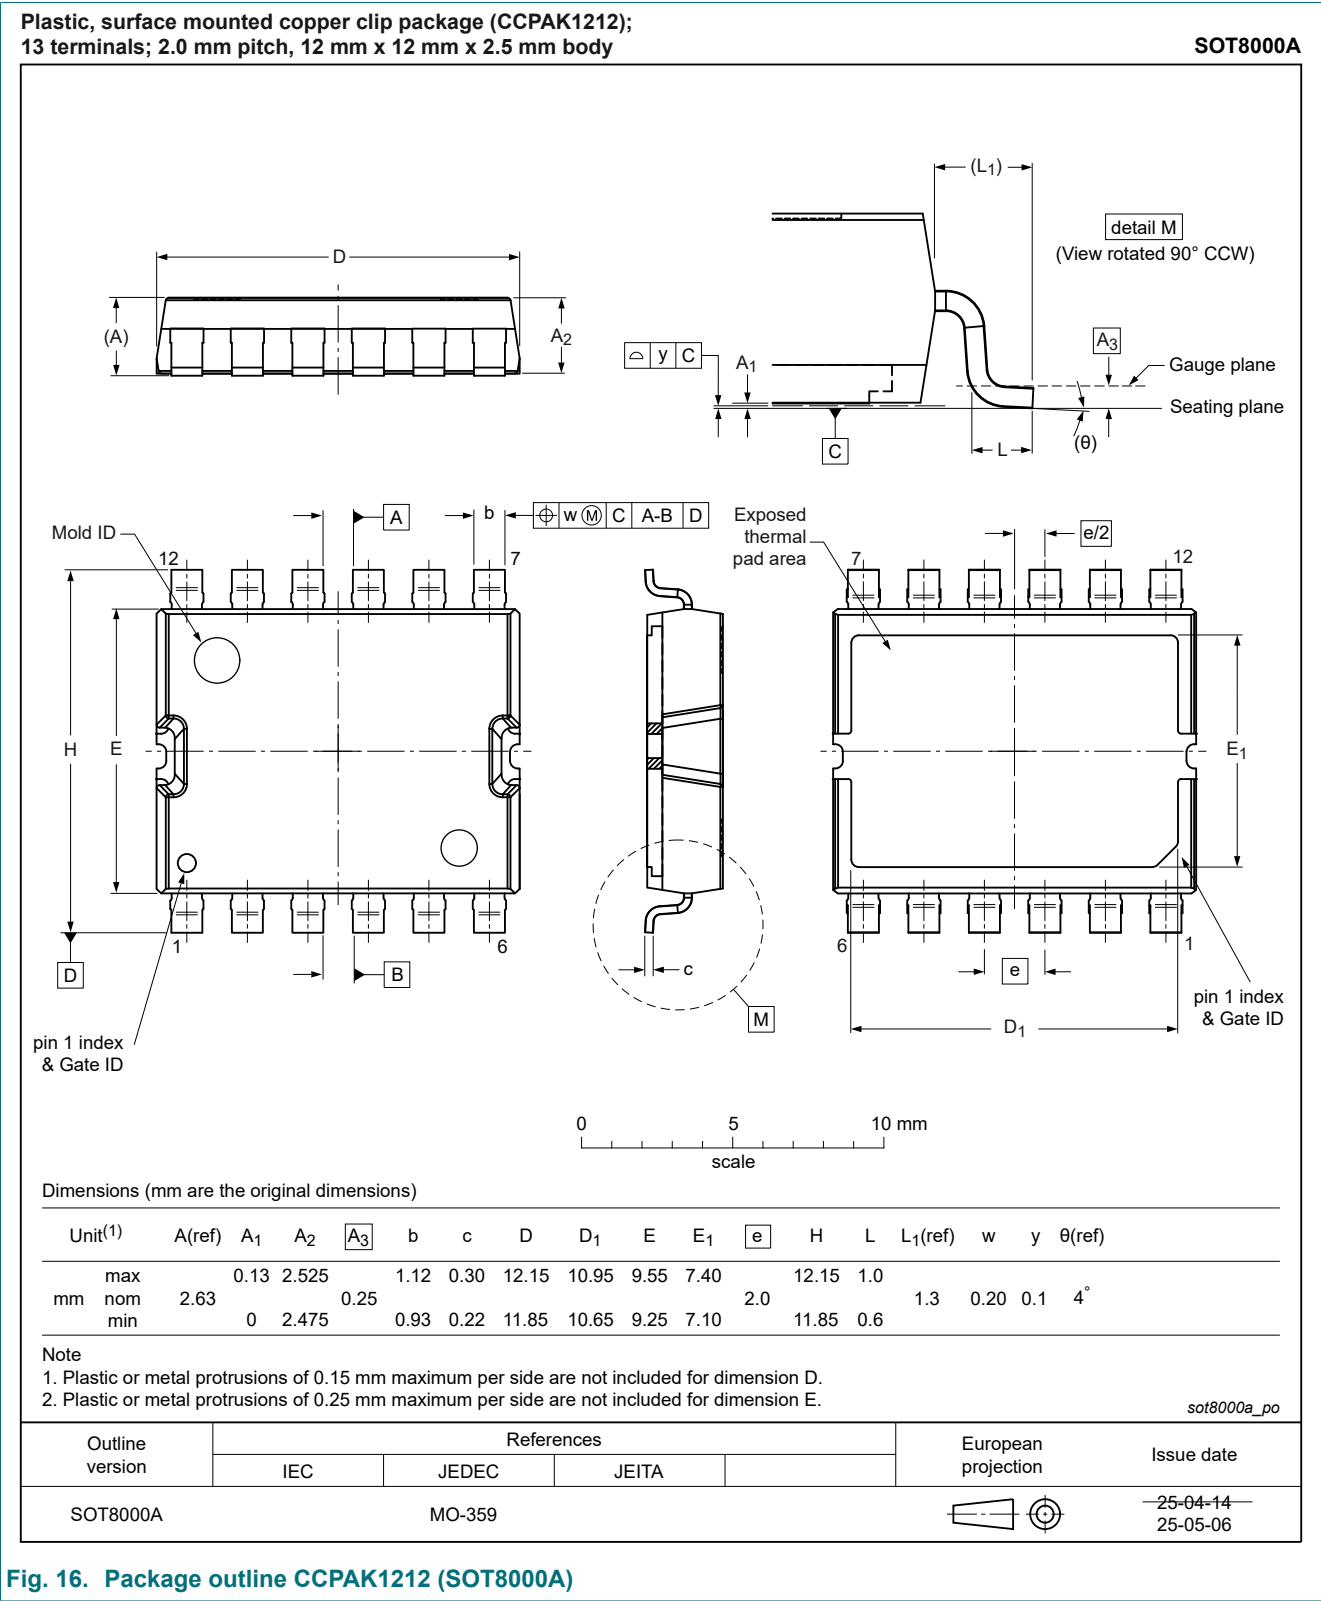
Package outline CCPAK1212 (SOT8000A)
